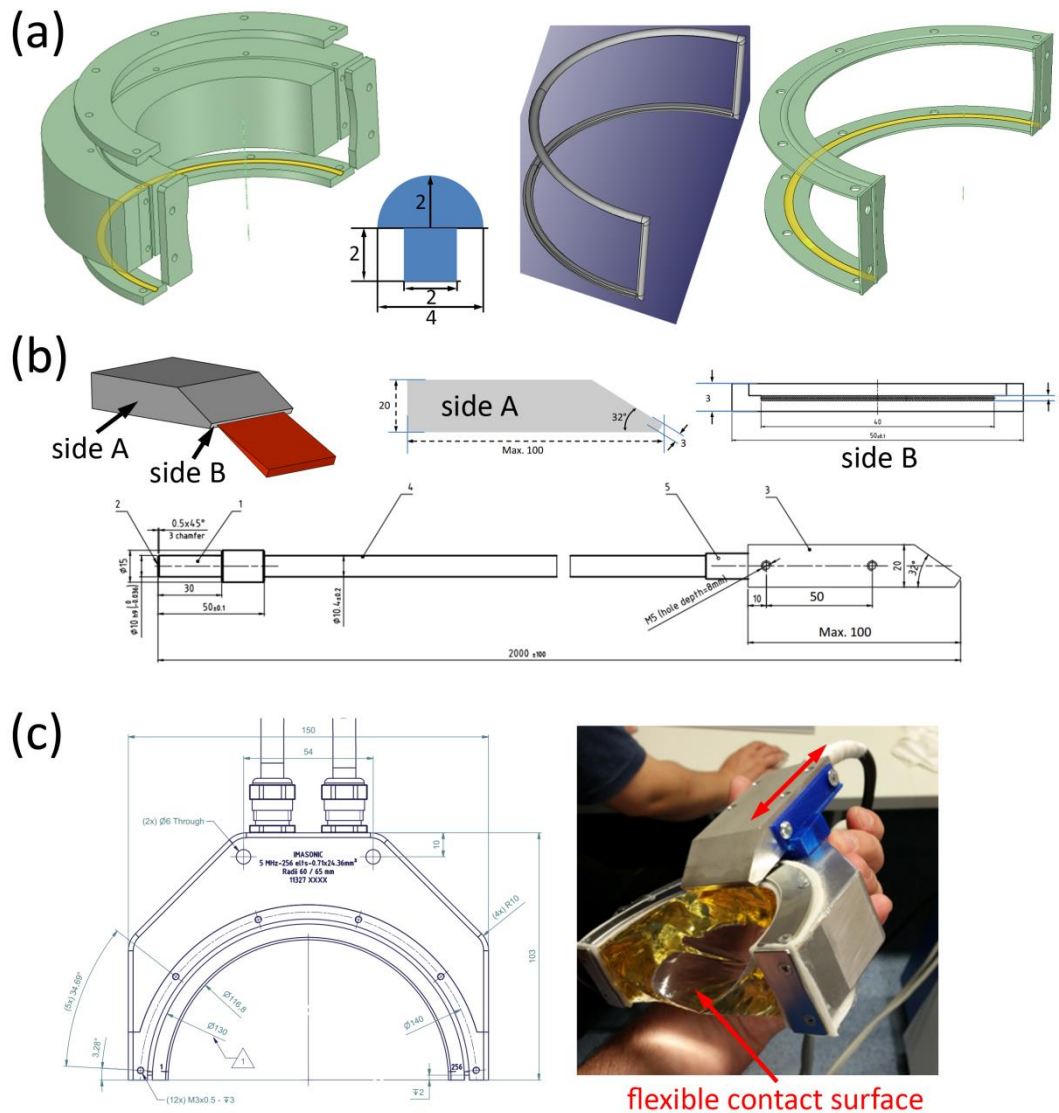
Design and implementation of the deployment prototype. (a) 3D-CAD model of the new water coupling concept: array and counter-plates are depicted on the left; the first O-ring is depicted with a cross-section in the middle; a second O-ring is depicted on the right. (b) Novel illumination concept showing light exiting the rectangular fiber output at a 32° angle. (c) Technical drawing of the new detection array with integrated coupling mechanics (left) and the fully assembled implementation (right) coupled with water and featuring a movable carriage (back and forth) to optimize illumination according to the shape of the flexible contact surface (foil).
